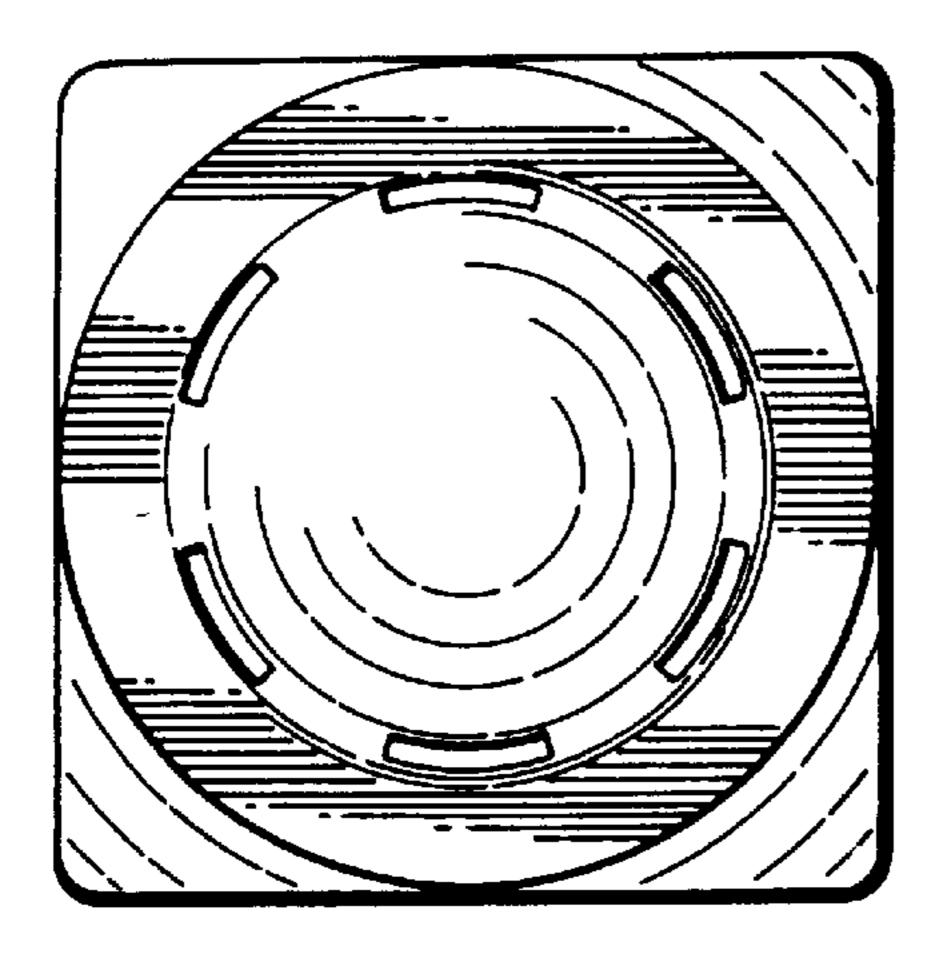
is a top plan view of a second embodiment of a threaded fastener showing my new design.
